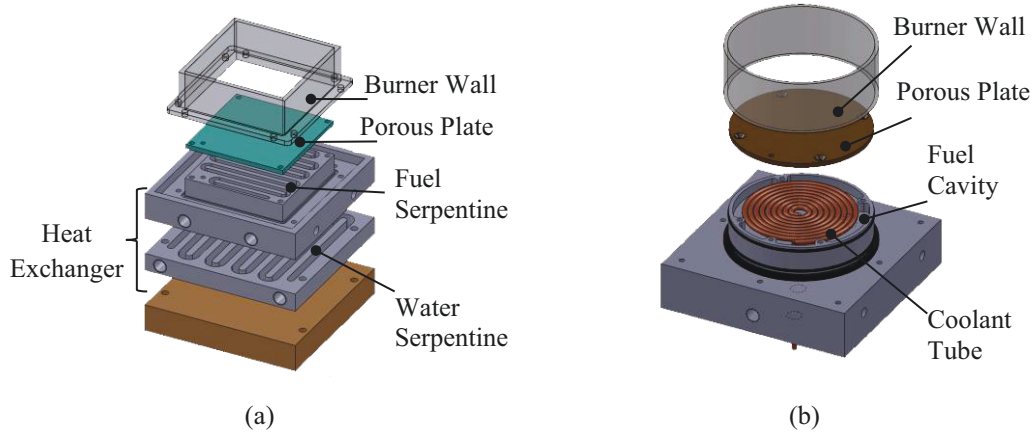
Exploded views of (a) square and (b) circular burner
